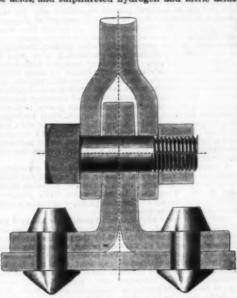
BRACE FASTENING AS IT SHOULD BE
